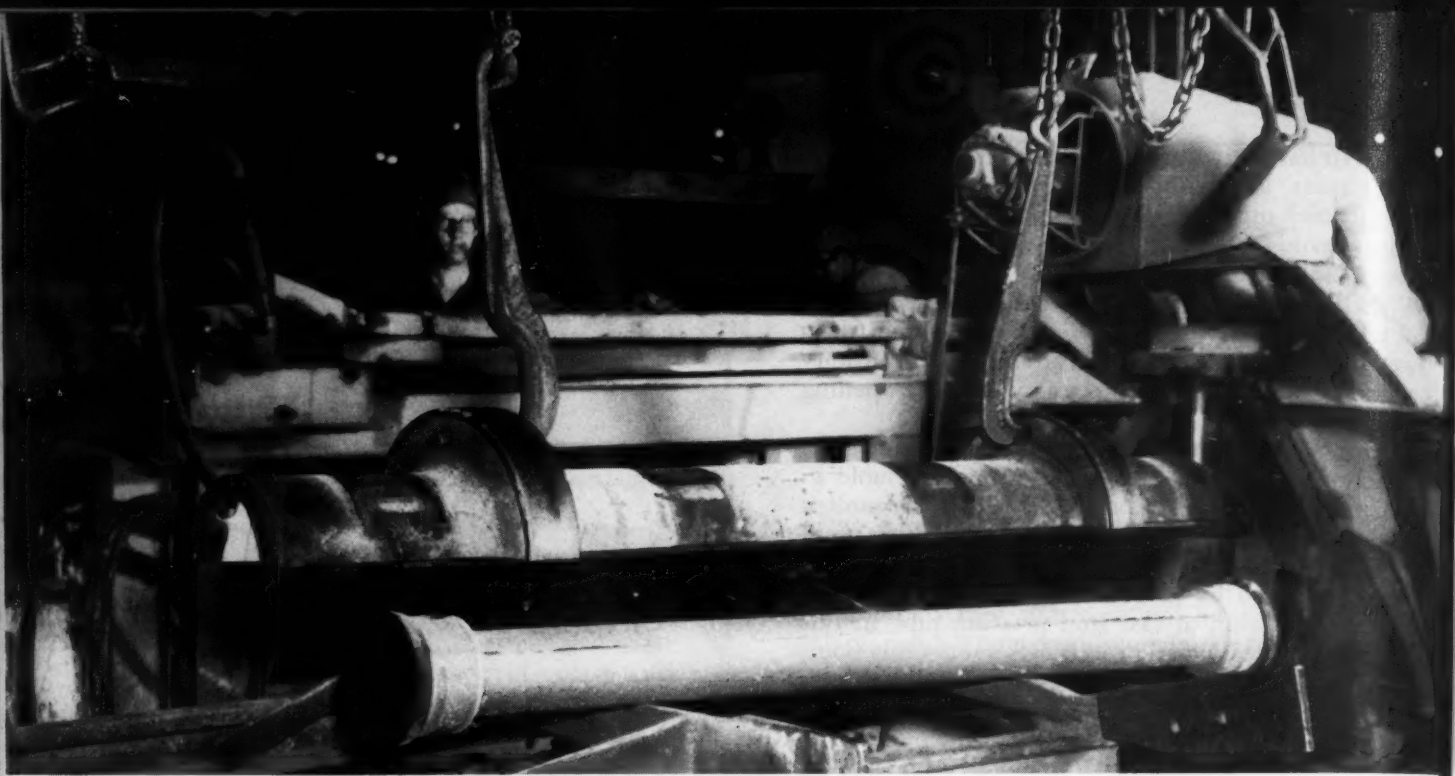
Centrifugal cast soil pipe as removed from cope half of split mold made of unalloyed cast iron.
